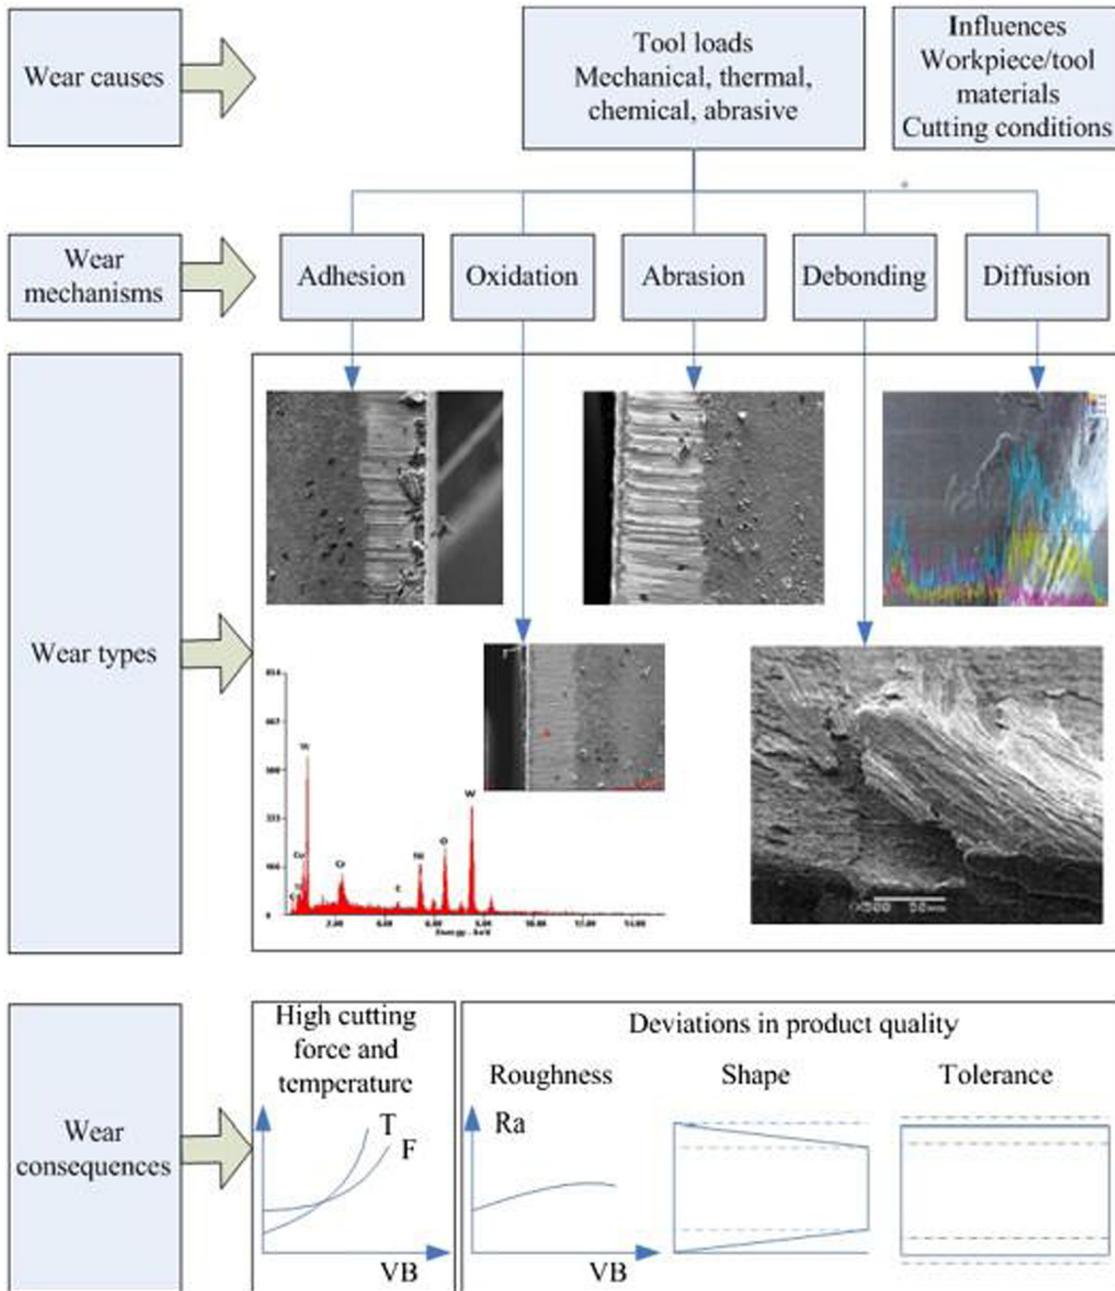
Causes, types, and mechanisms of tool wear in the machining of nickel-based superalloys [65].
